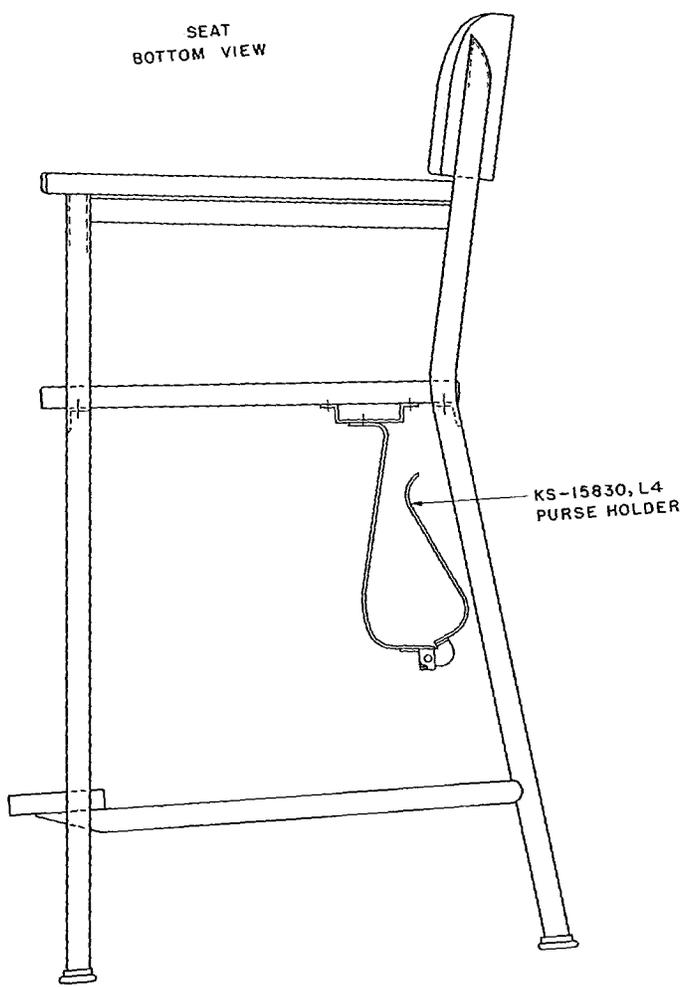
Method of Mounting KS-15830, L4 Purse Holder to KS-5587 Supervisor Chair
